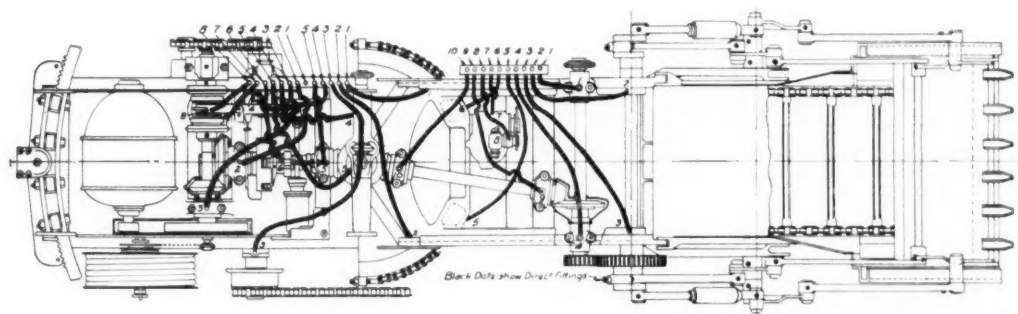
Lubrication chart for a Myers-Whaley automatic coal loader equipped with ball bearings. See manufacturers chart for parts identification. *Courtesy of Myers-Whaley Company
